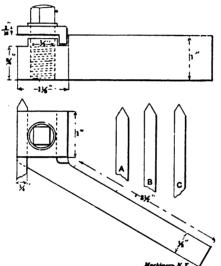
Thread Tool Holder for High Speed Steel Tools.
